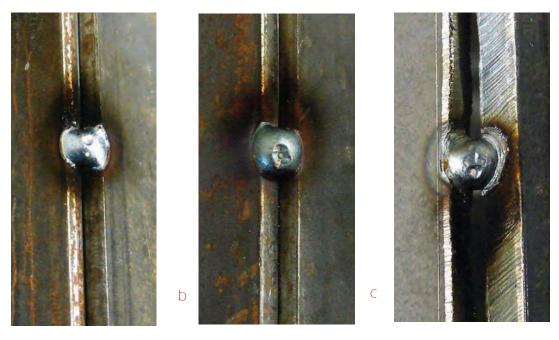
a) A properly tacked outside corner joint. b) An over-welded tack. c) Off-center tack.
